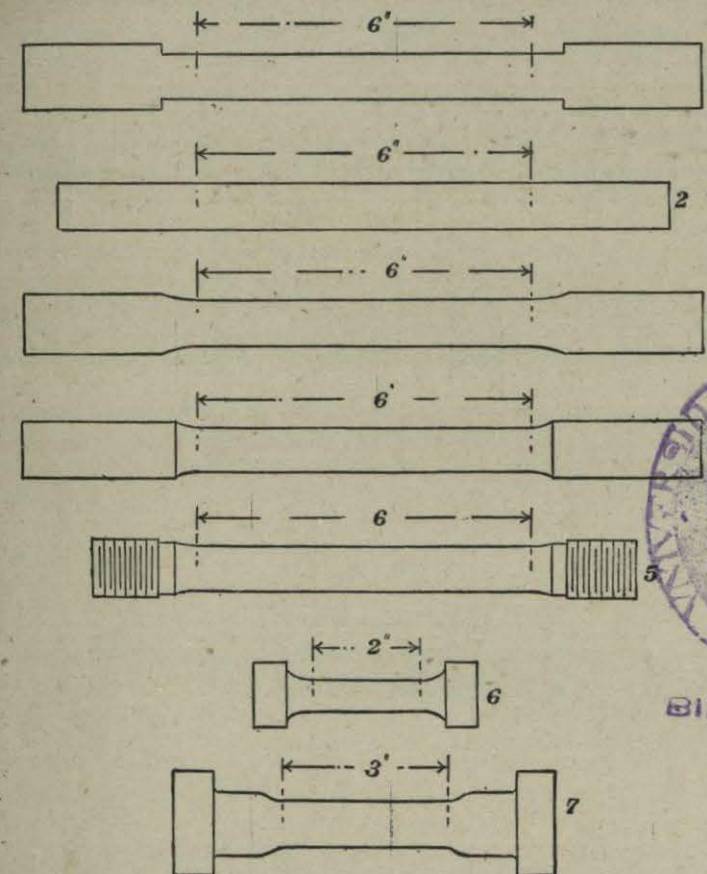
Bars for Tensile Tests.—Nos. 1, 2, and 3 are flat bars; Nos. 4, 5, 6, and 7 round. No. 1, showing sharp corners where the section is reduced is a form to be avoided; the shoulders should be shaped as shown in No. 3.
